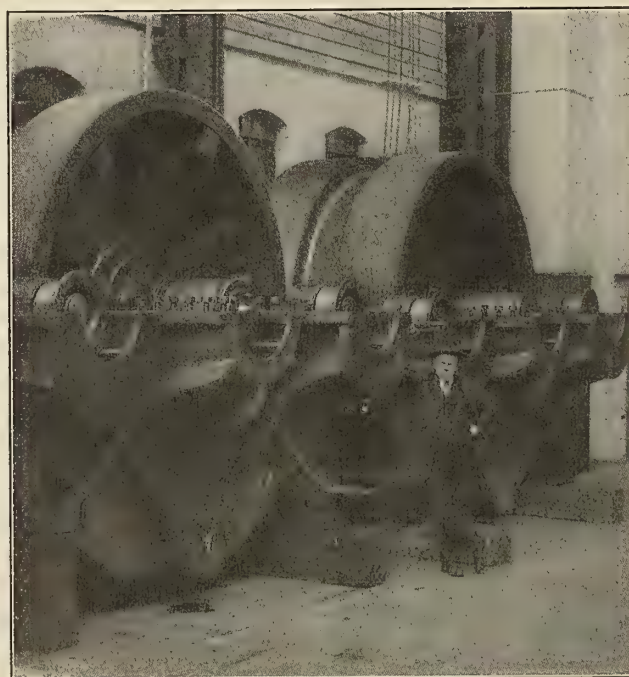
Gear Wheels and Pinions Assembled in Casings
